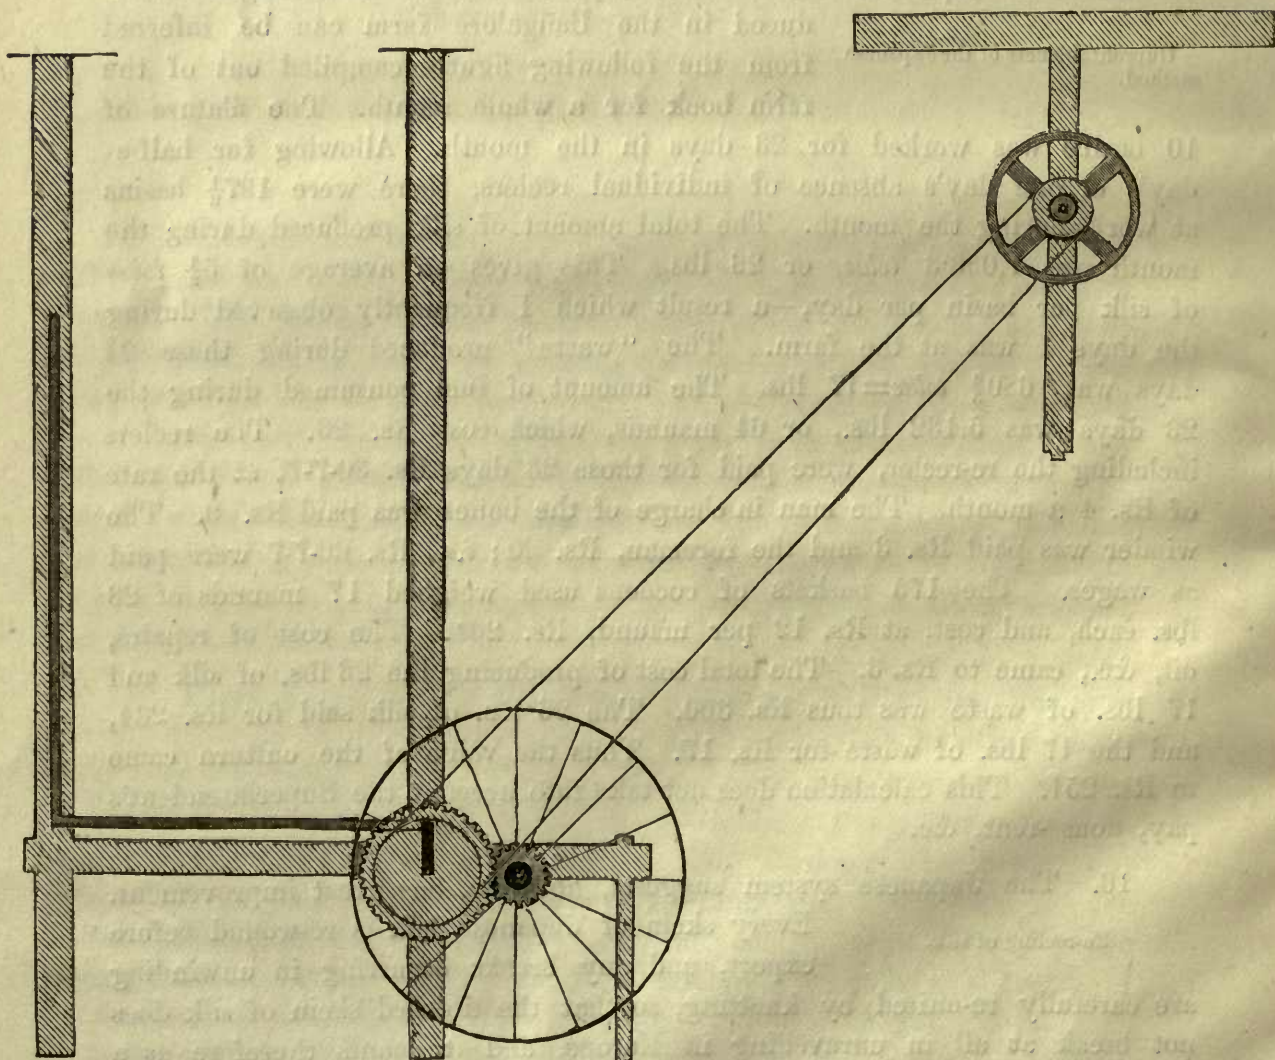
Fig. IX.—Driving gear of Japanese Reeling Machine showing attachment to Re-reeling Machine.
